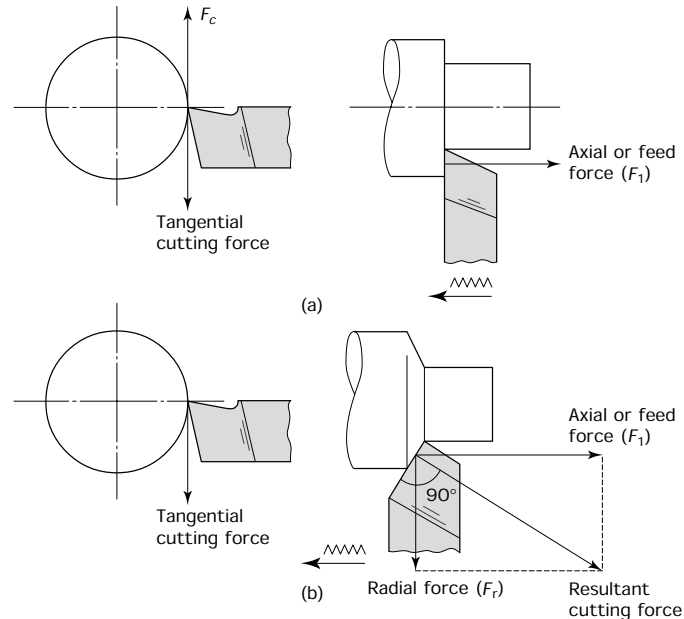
Forces acting on turning tools: (a) orthogonal cutting (no radial force on tool); (b) oblique cutting
